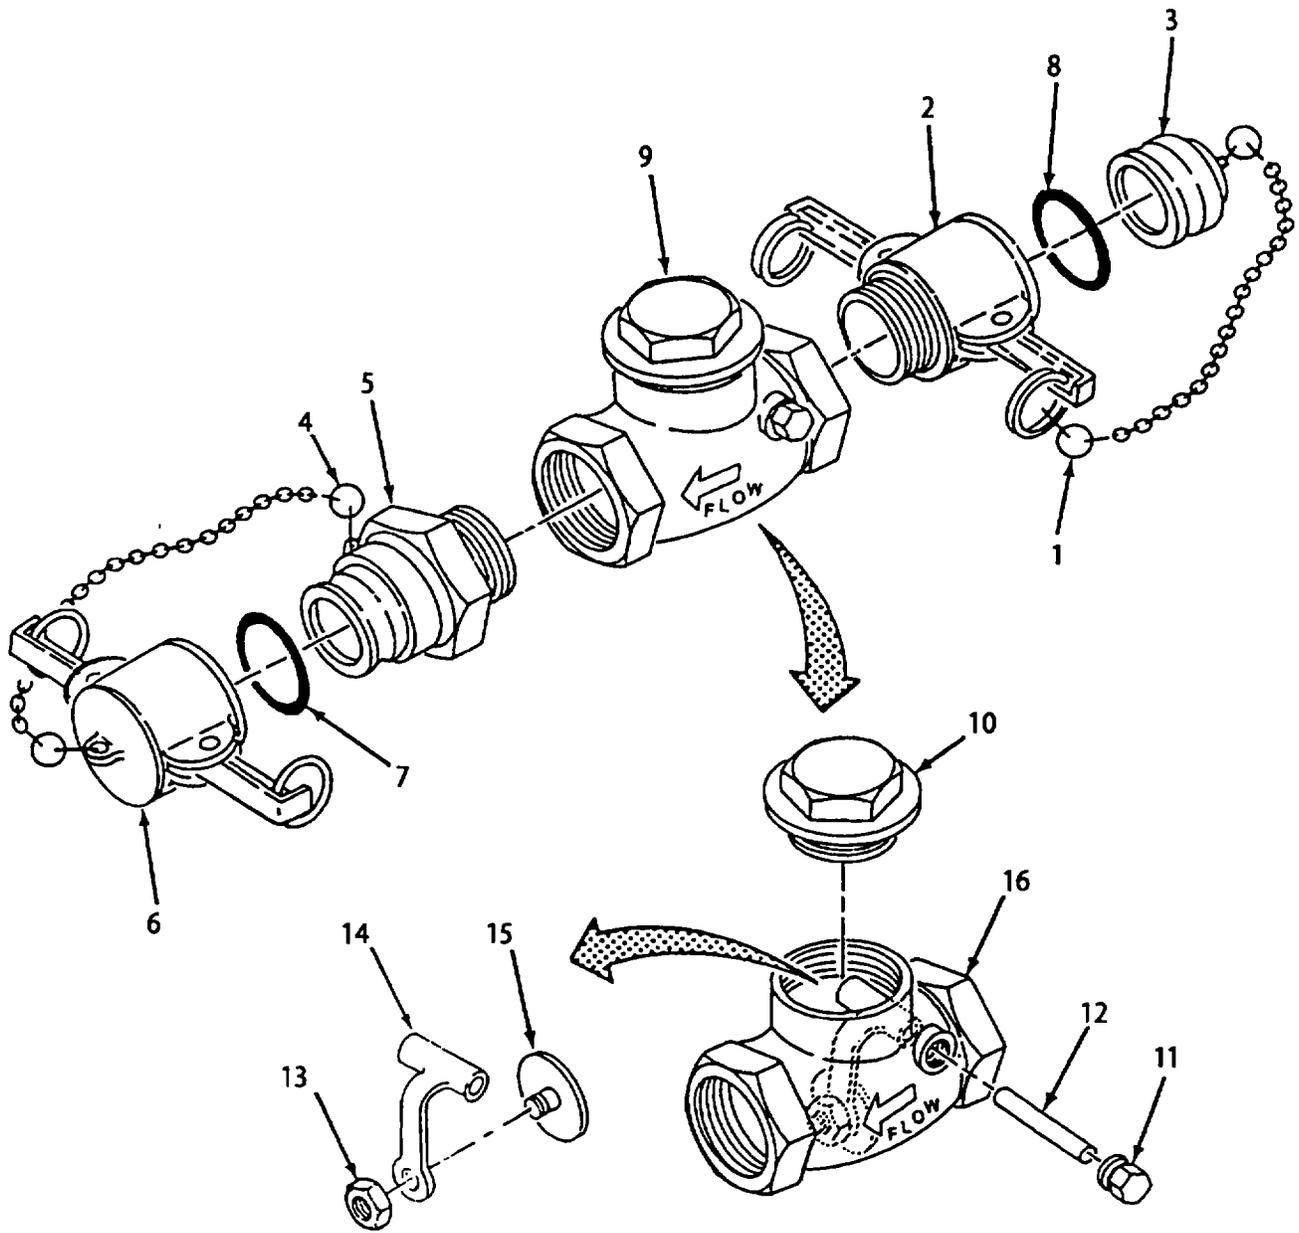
Check Valve Assembly (2-Inch) Repair
